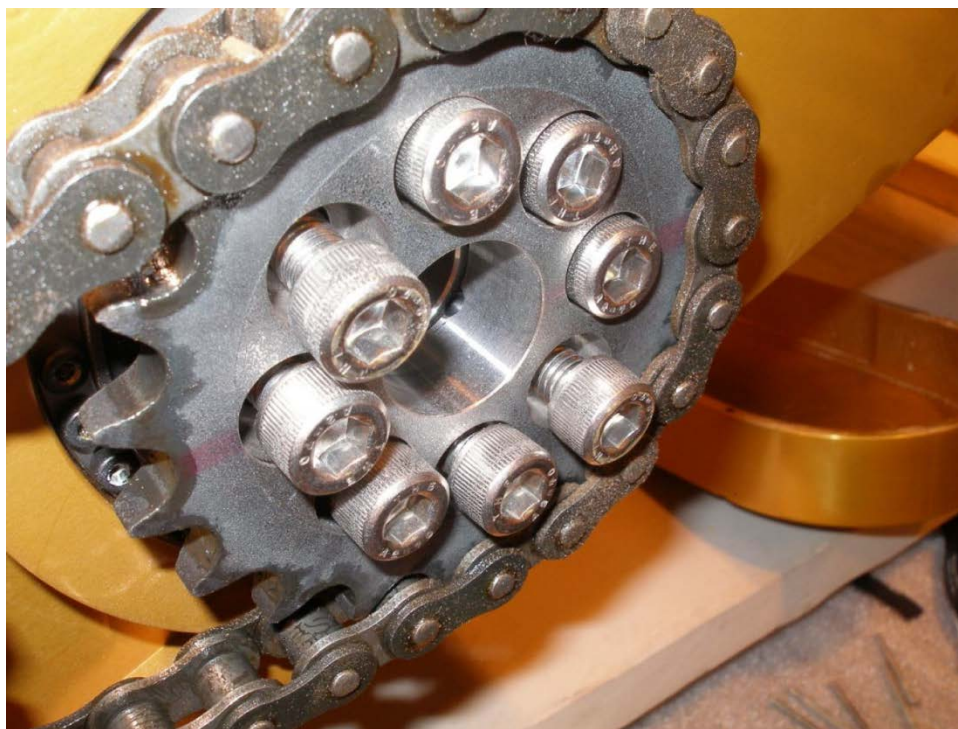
After Desert Rats 2010, most of the screws securing the bucket drive sprocket were loose and partly backed out.
